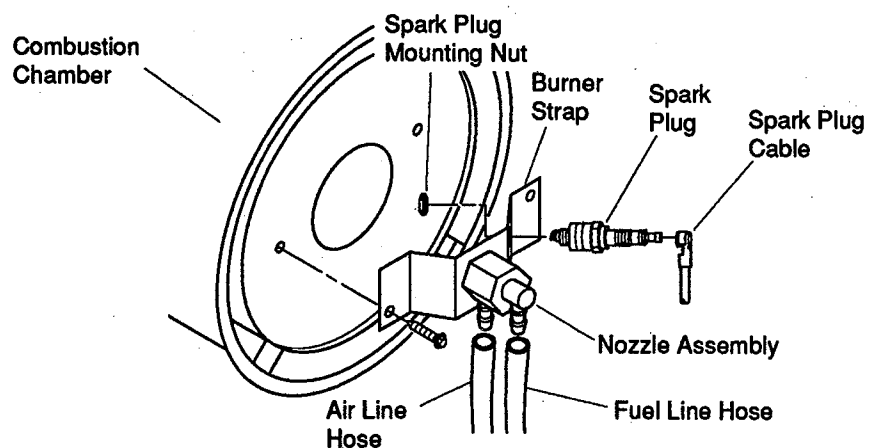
Spark Plug Removal, 35/50,000 BTU/Hr Models
